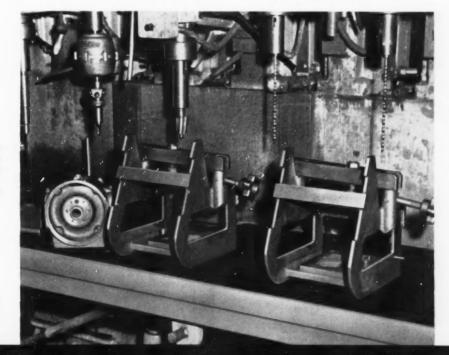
These welded-steel jigs are easy to roll over for drilling holes located in different planes. An additional advantage is their light weight.
